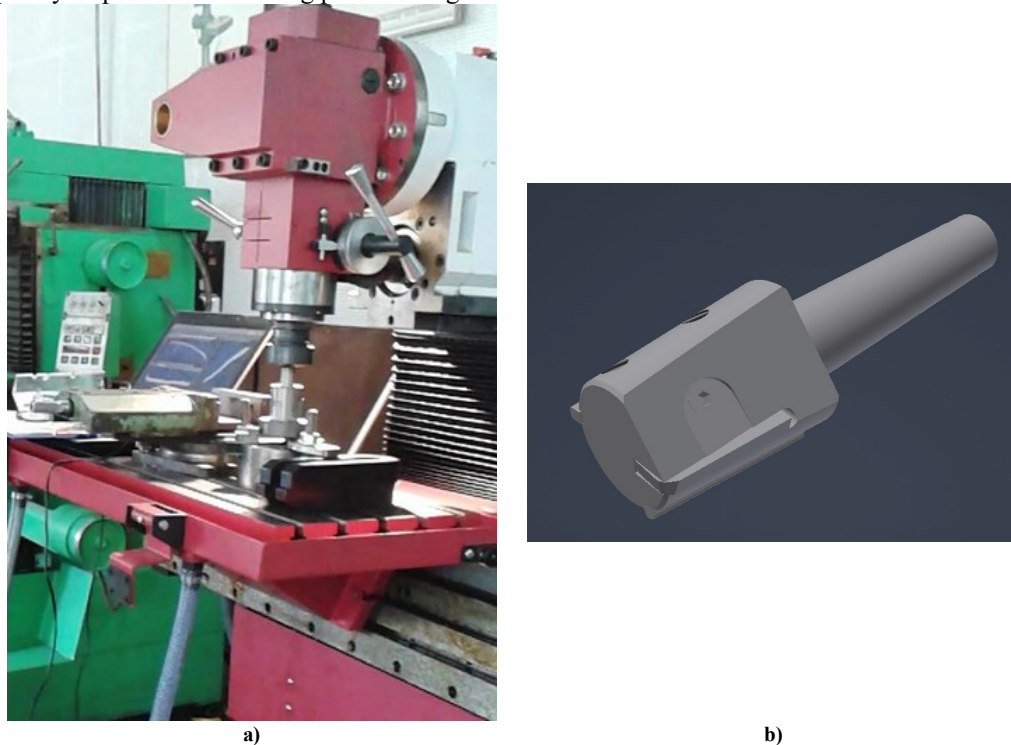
Universal measuring stand (a) based on the universal milling machine OMM64S, equipped with a Sinumerik 802 D CNC system and a conical unilateral reamer tool (b)
